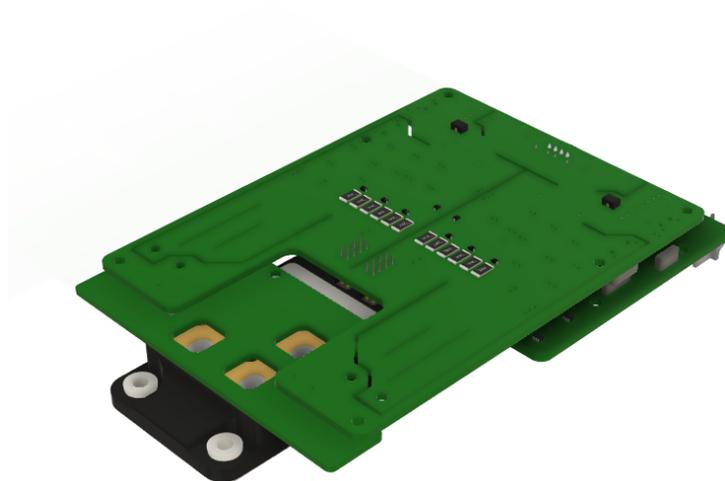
Three Board Gate Driver design for GE Modules (Modules attached)
